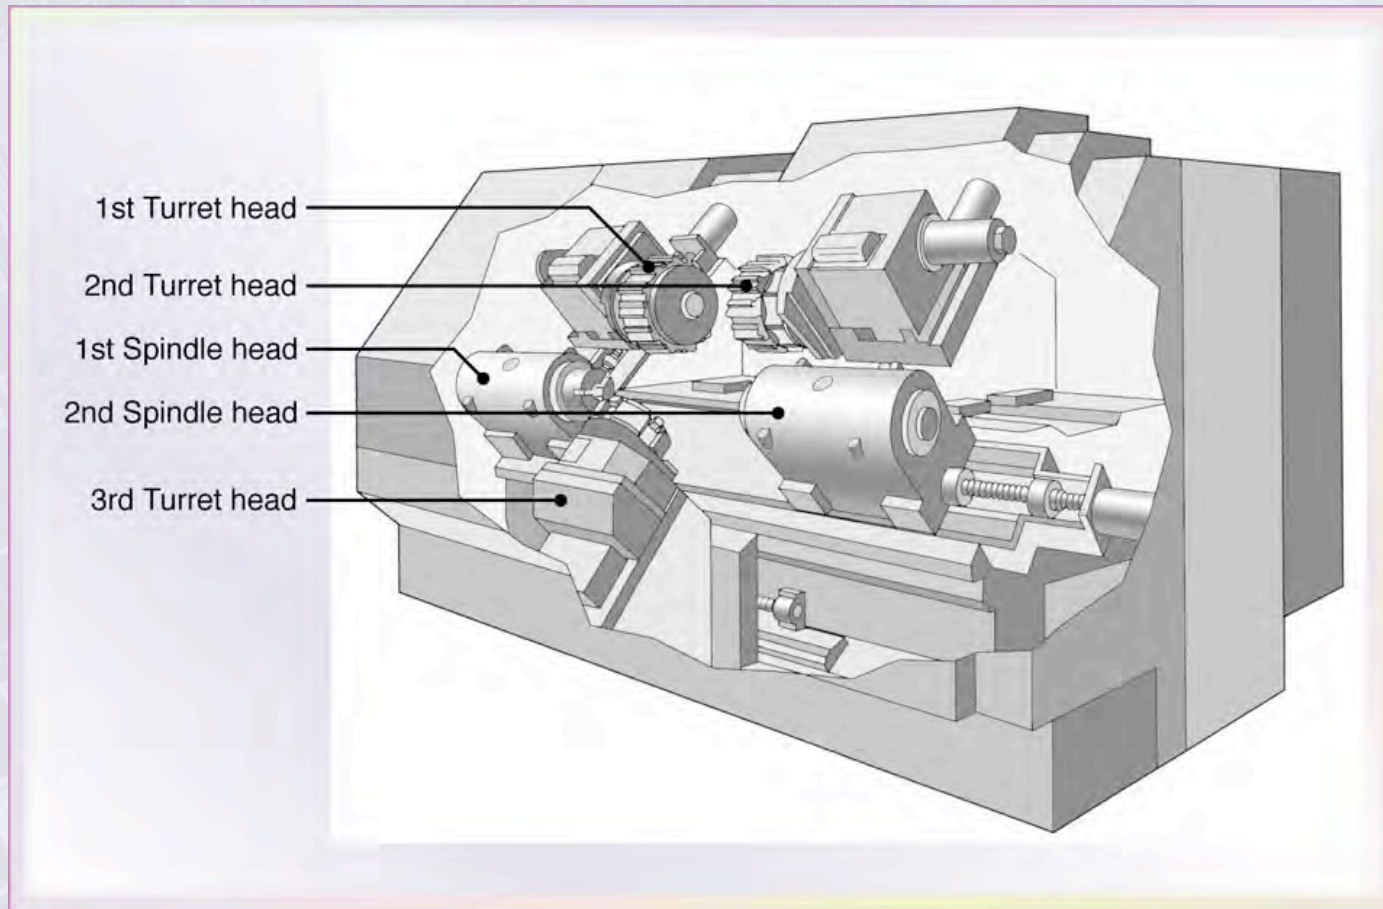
Schematic illustration of a computer numerical-controlled turning center. Note that the machine has two spindle heads and three turret heads, making the machine very flexible in its machining capacities. *Source:* Courtesy of Hitachi Seiki Co., Ltd.
